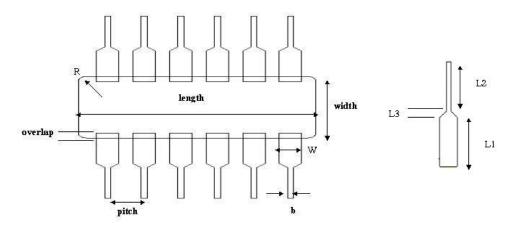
Dual Inline Pin Package with parameters, also showning pin detail
